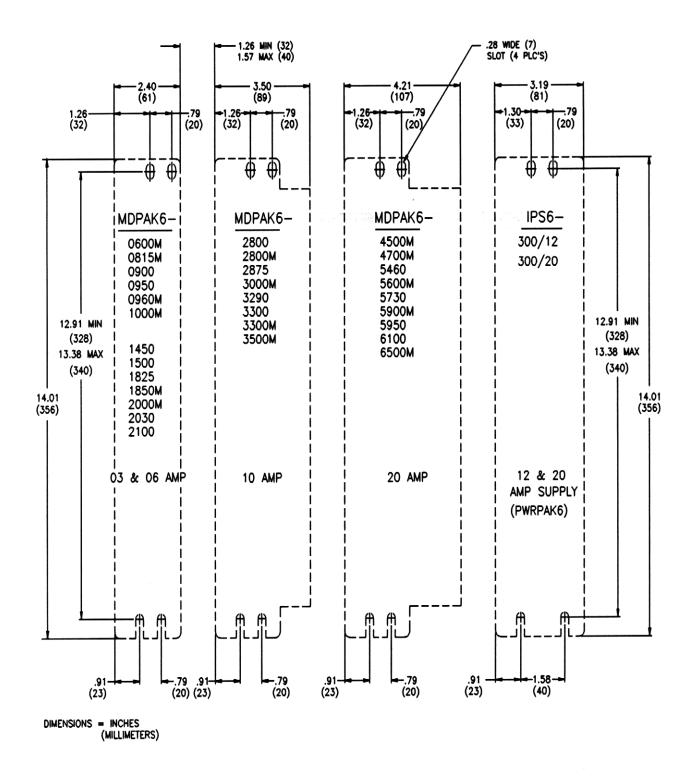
Drive and Power Supply Mounting Hole Layouts (Current Configuration)
